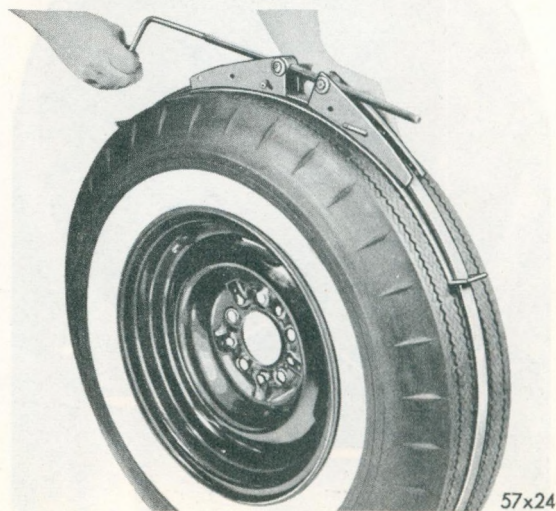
Constricting Centerline of Tire with Mechanical Tool
